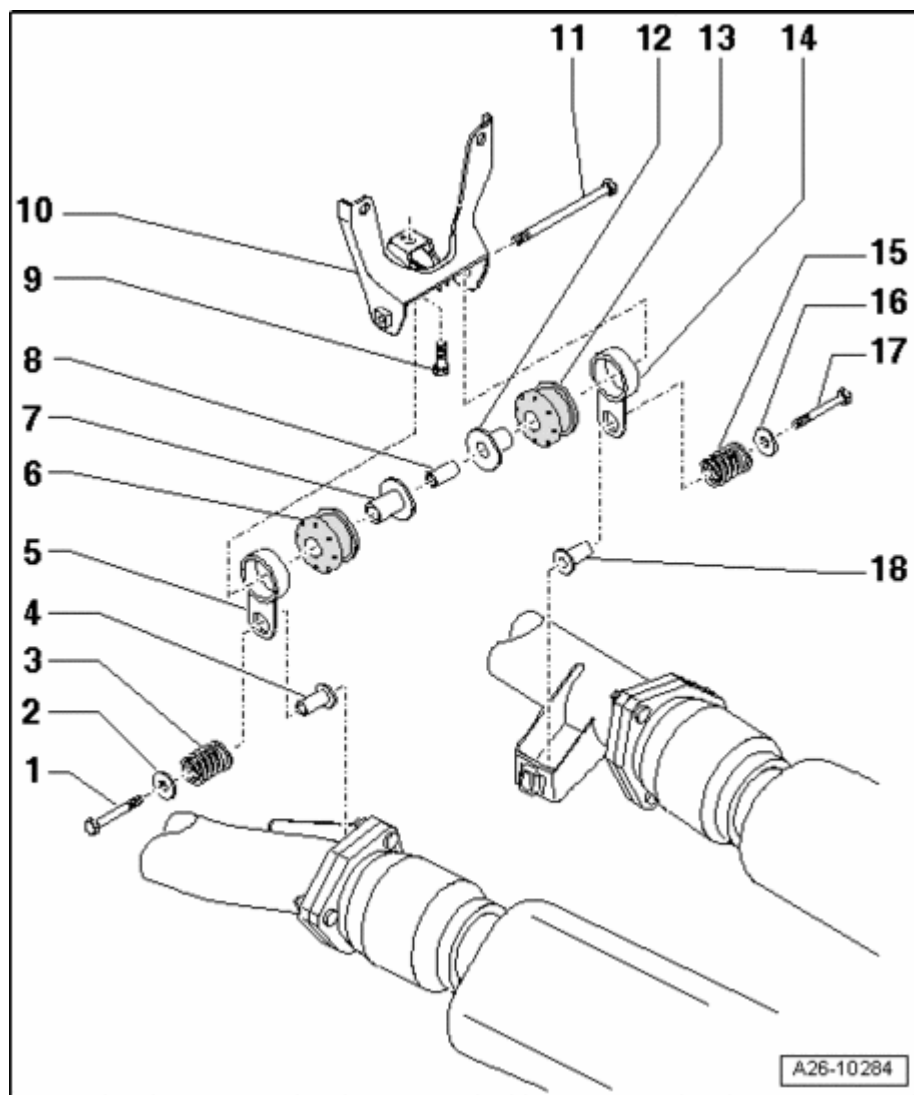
Exhaust System, Component Overview - Individual Components Of Mounting
